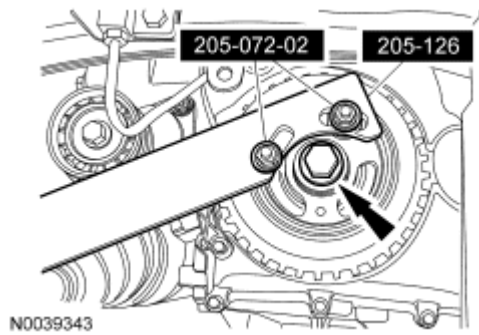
Locating Crankshaft Pulley Bolt And Special Tools (205-126, 205-072-02)
